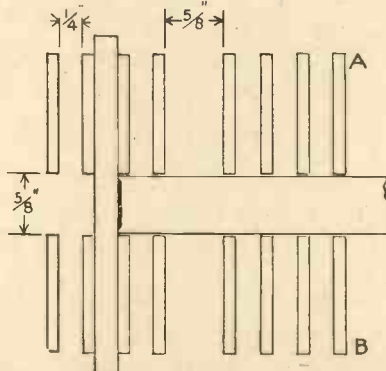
A useful device for accurately spacing cardboard sleepers.
